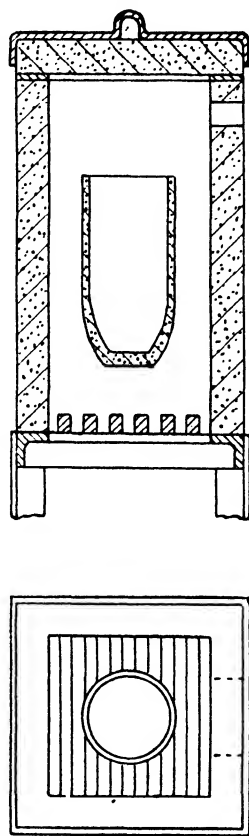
Diagram depicting sectional side elevation and plan of a coke-fired pit furnace with crucible in position.
